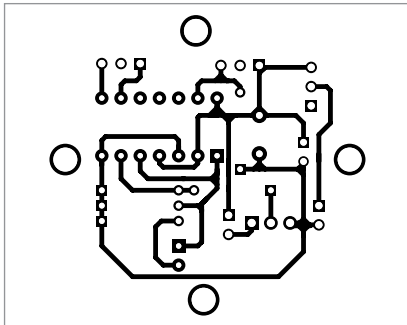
Actual-size PCB layout of the cistern overflow alert system
